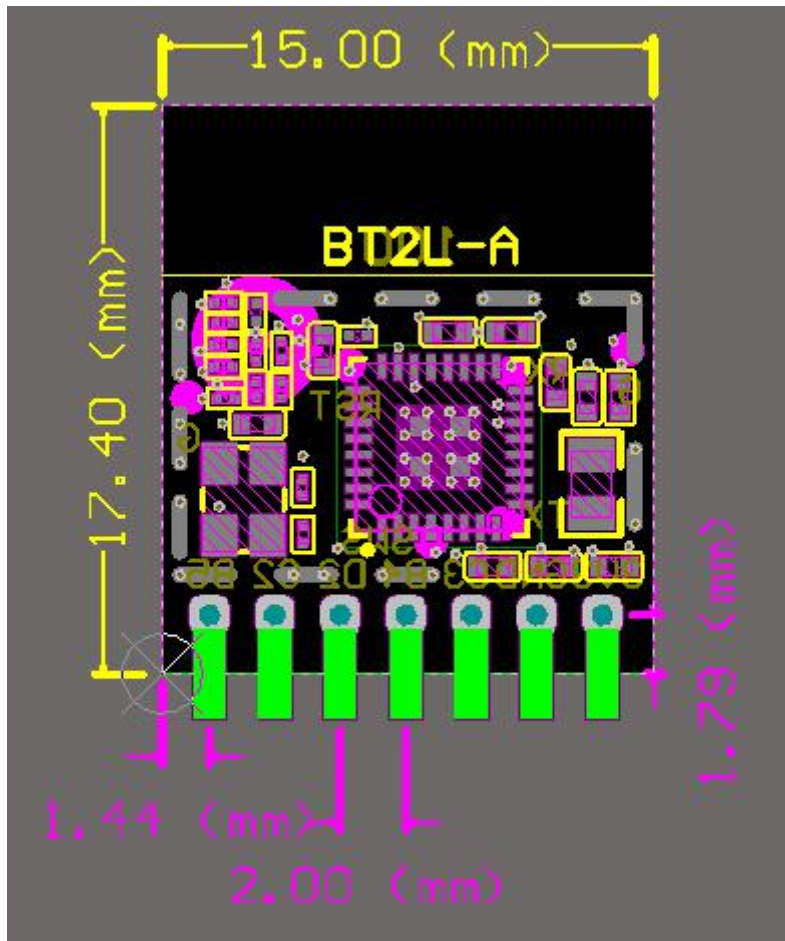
BT2L-A mechanical dimensions and rear solder pad dimensions
